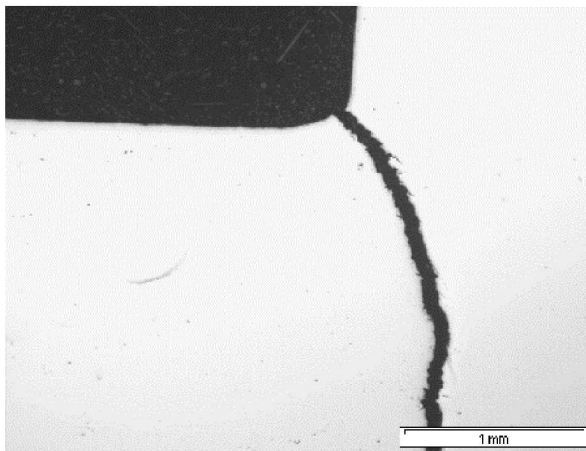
Crack initiation at the sharp radius of a plastic mould die of a hardenable corrosion resistance plastic mould steel.
